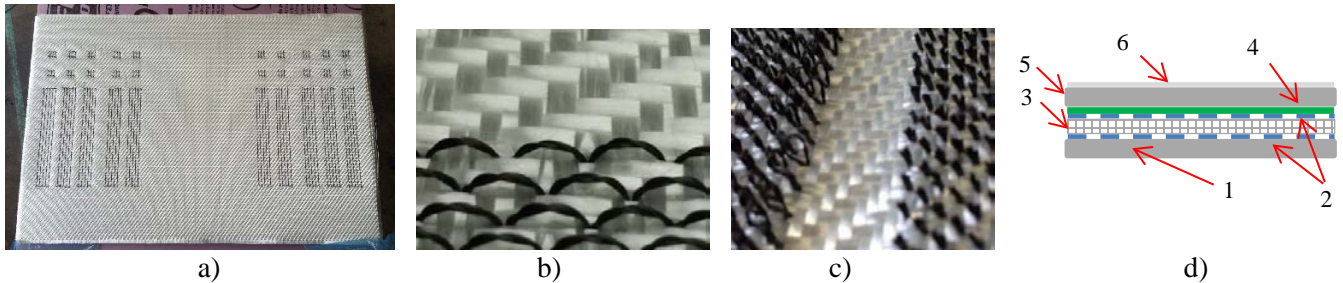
Preform manufacturing and infusion set-up: a) 40x60 cm<sup>2</sup> preform prior to infusion, b) Top view of tufted area, c) Bottom view of tufted area with loops intact (left) and shaved (right), d) Vacuum infusion set-up (1- Molding plate, 2- peel ply, 3- preform, 4- flow mesh, 5- caul plate, 6- vacuum bag).
